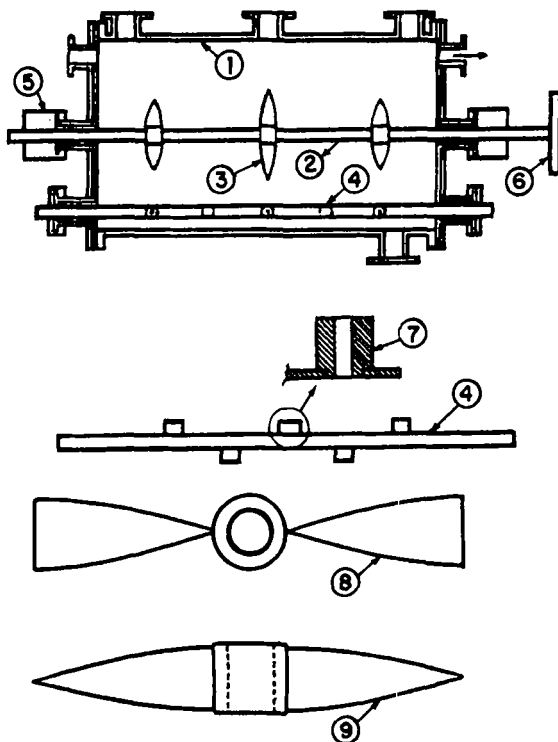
Horizontal contactor and various types of impeller. 1, vessel; 2, impeller shaft; 3, impeller; 4, sparger assembly; 5, gland and stuffing box; 6, pulley; 7, nozzle; 8, plan; 9, elevation. (After Joshi *et al.*, 1985.)
